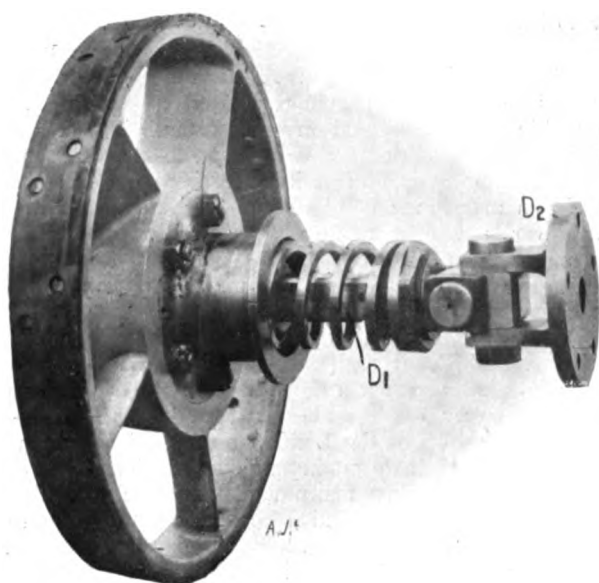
The Brotherhood Main Clutch. View of the Inner Cone-member, showing its Fan-blades, the Clutch-spring, and the Universal-joint with its Coupling-flange.
